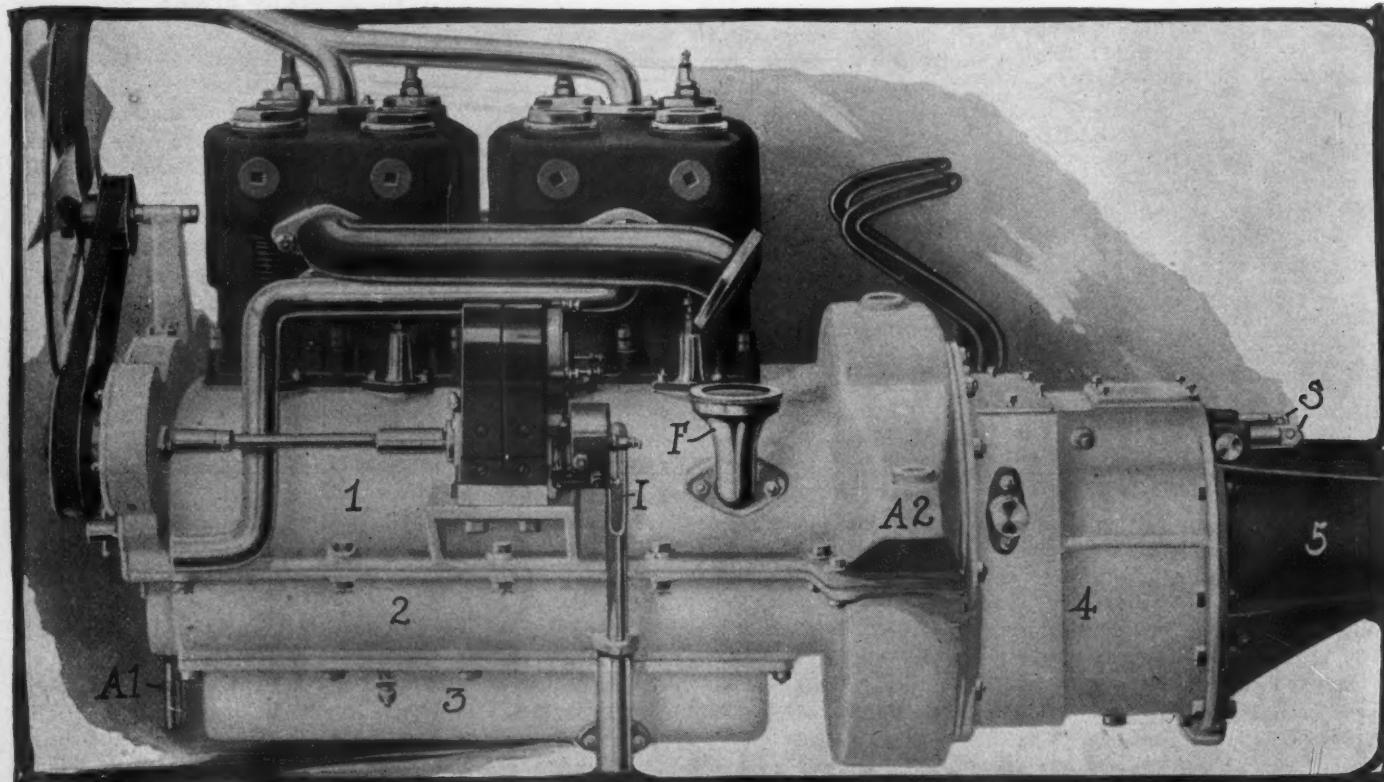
LEFT SIDE OF MOTOR AND GEARBOX ON OHIO 1911 MOTOR SHOWING THE FIVE CASTINGS REQUIRED TO MAKE UP THE SYSTEM
